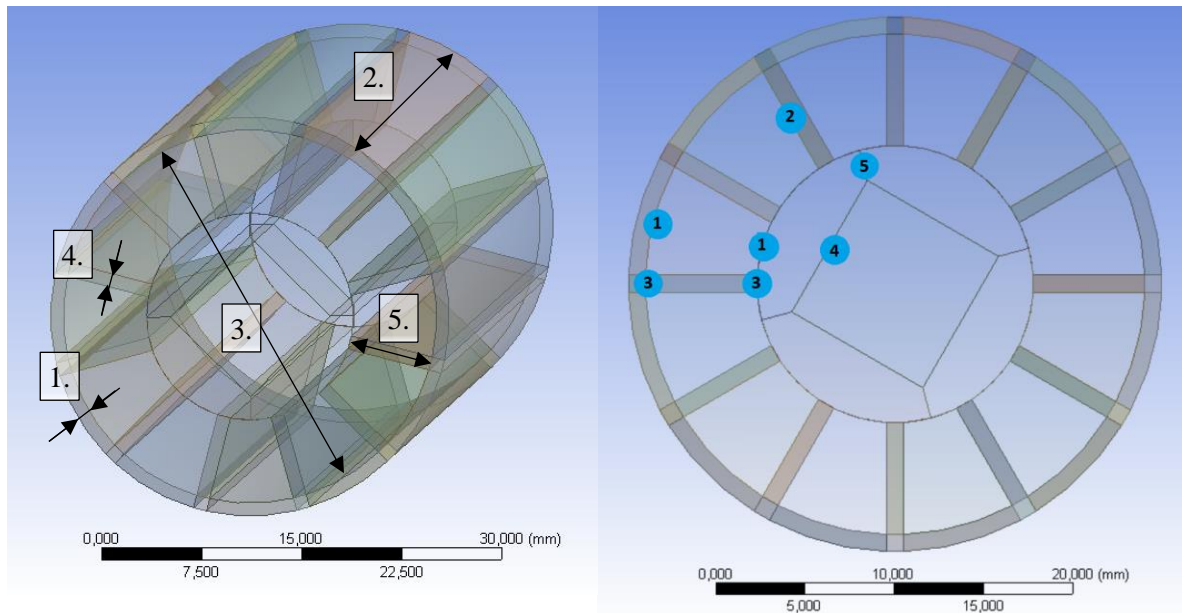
Geometry of the pipe in DM with dimensions (left) and edge sizing location (right)
